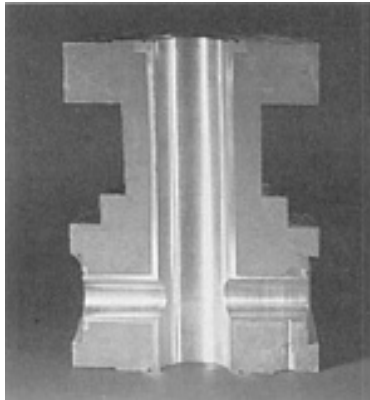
Low-alloy steel HIP clad with alloy 625 for corrosion resistance
